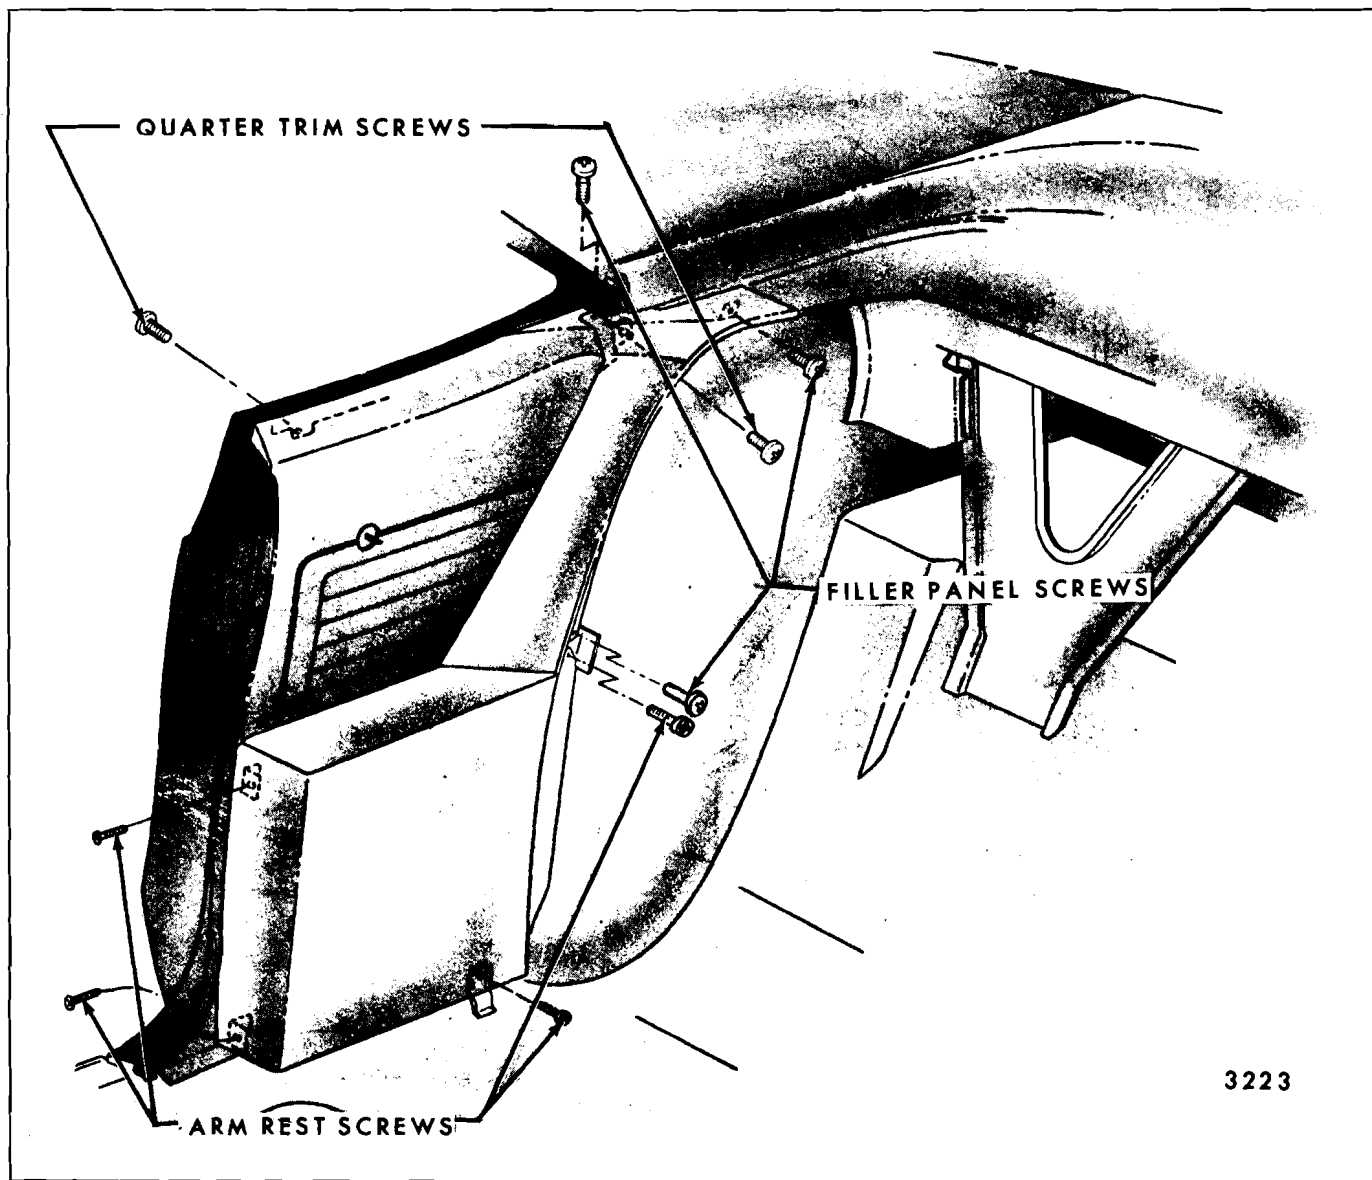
Rear Quarter Trim Assembly - "39487" Style
